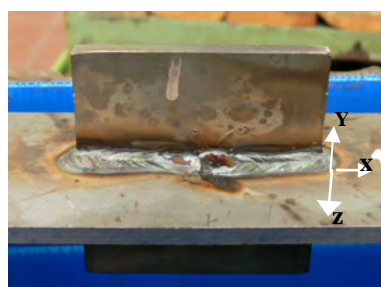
Photo of the fatigue test specimen and its dimensions.
